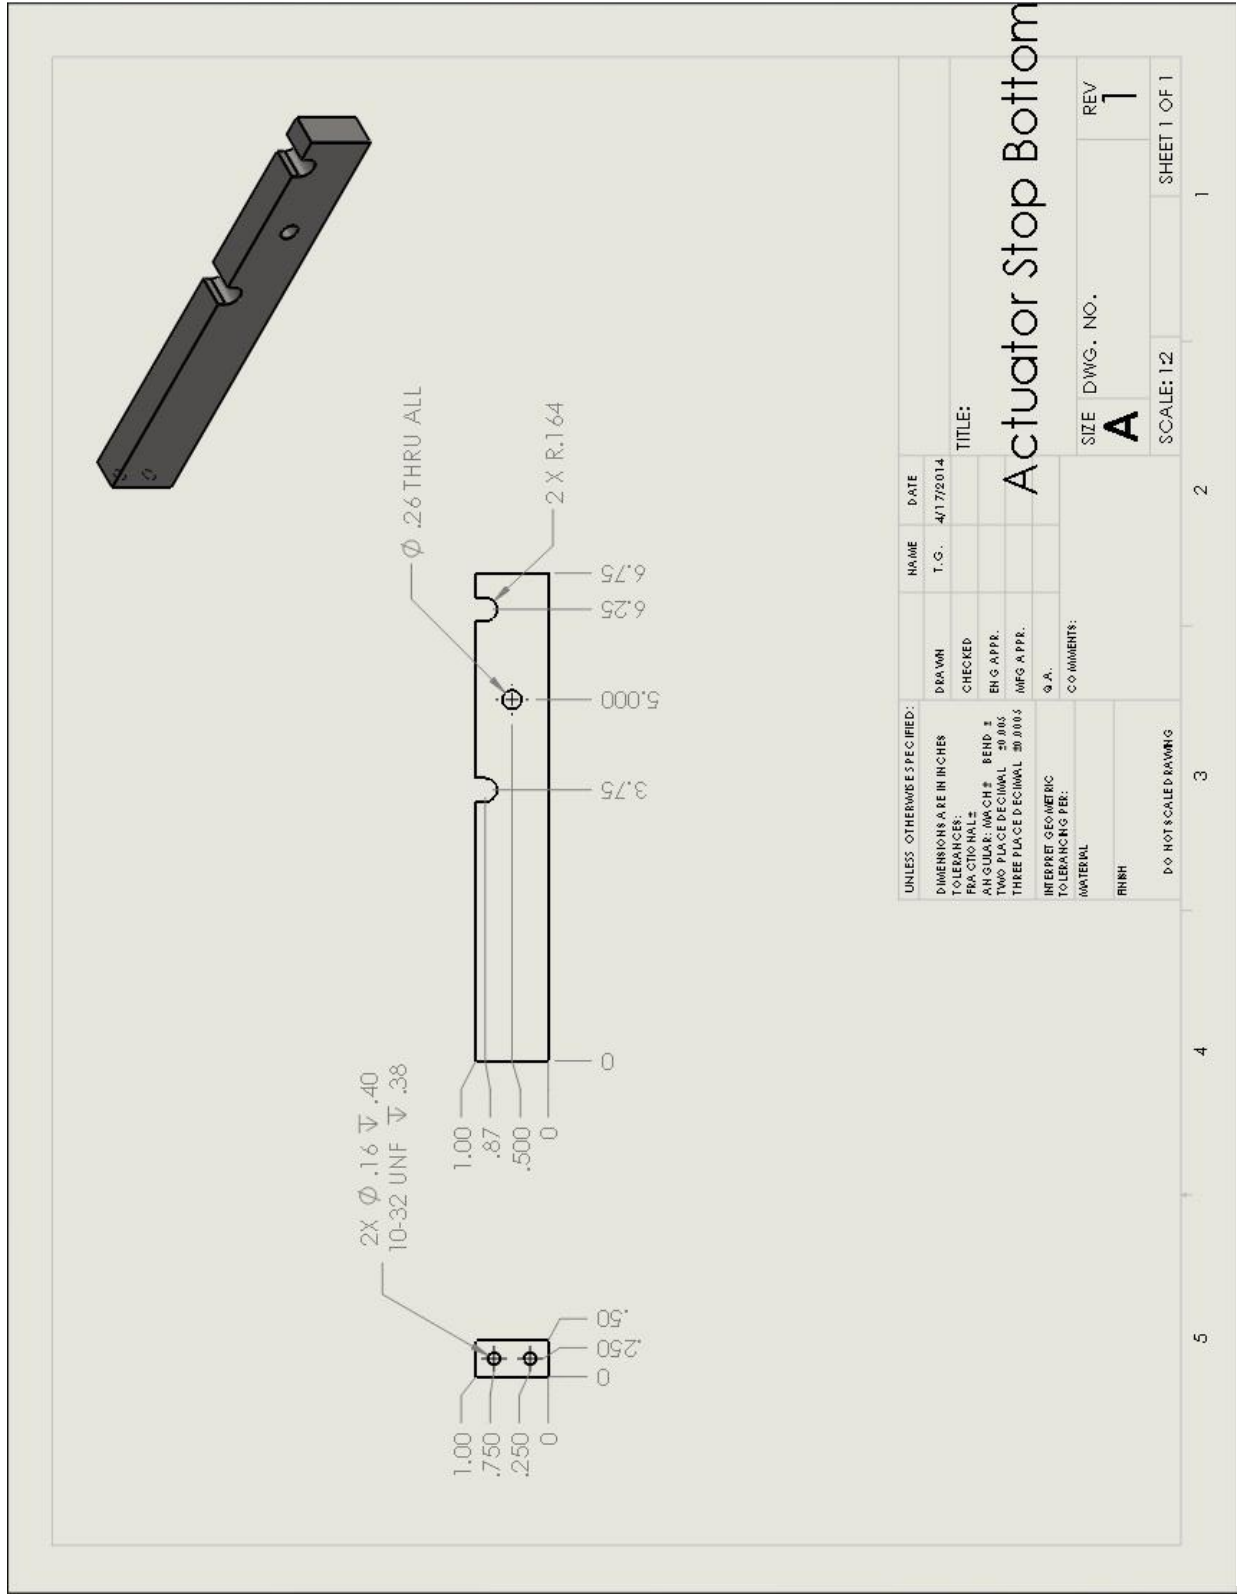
Engineering Drawing of Actuator Stop – Bottom Plate
